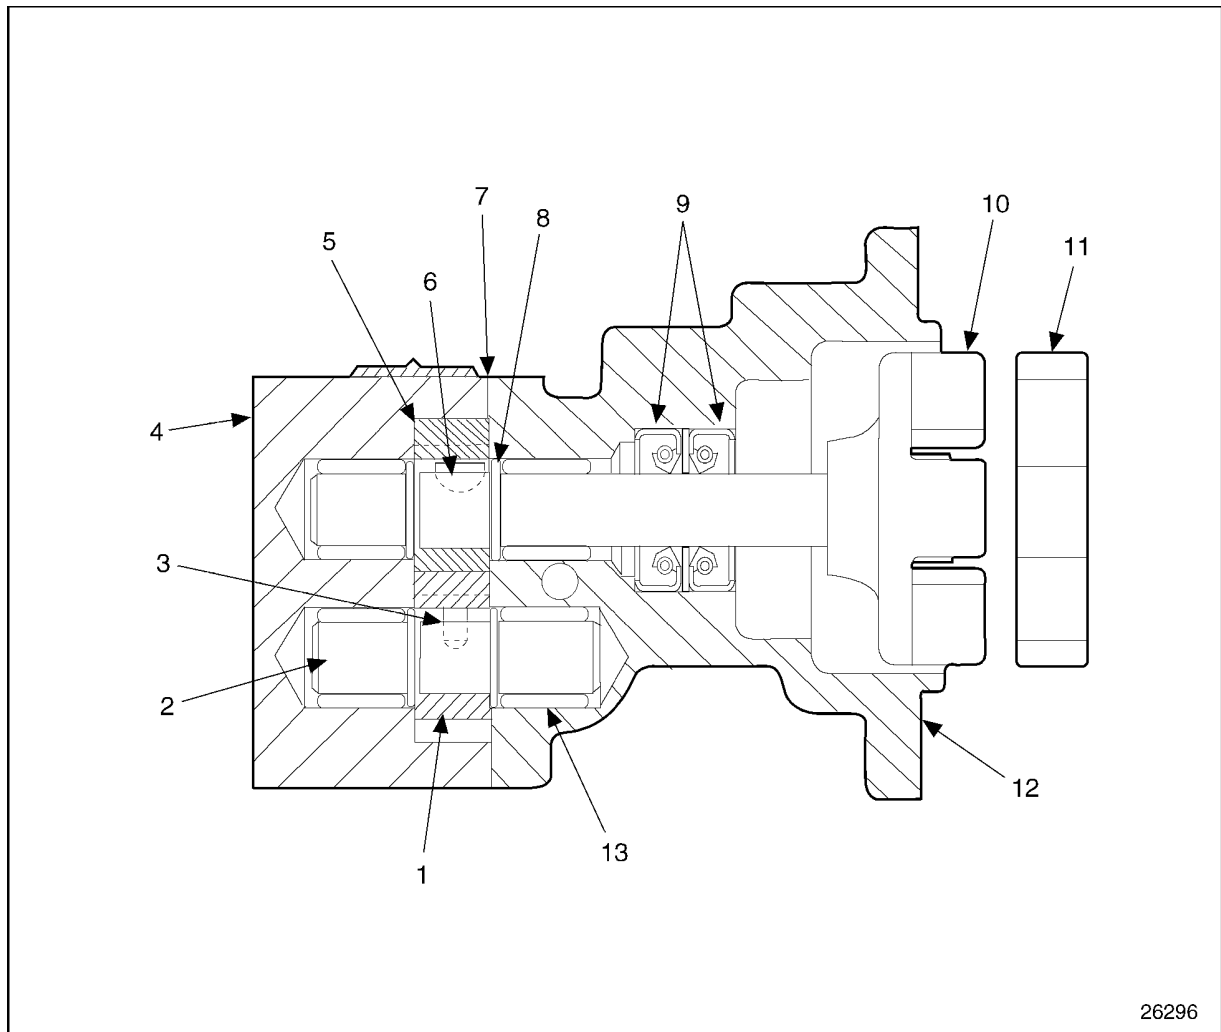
Current Gear Case-Mounted Fuel Pump Assembly
